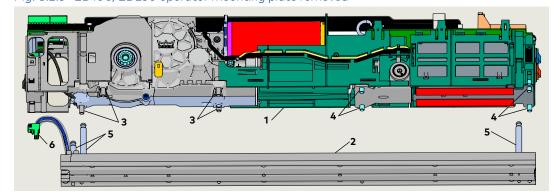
ED100/ED250 operator mounting plate removed
